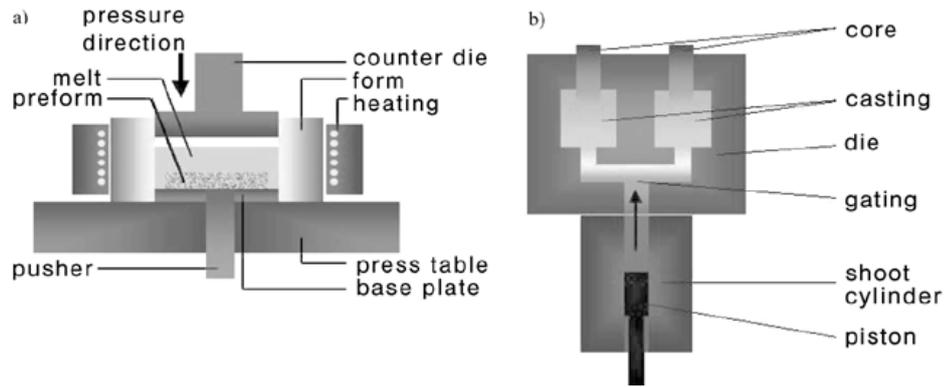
a) Direct and b) Indirect squeeze casting [3]
